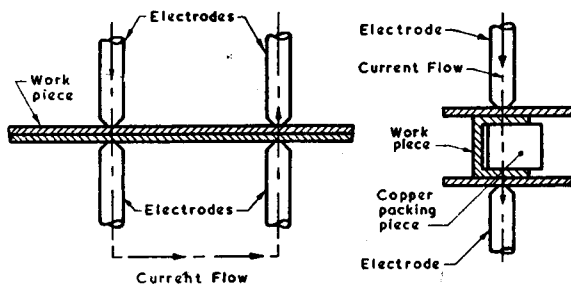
EXAMPLES OF SERIES-SPOT WELDING
